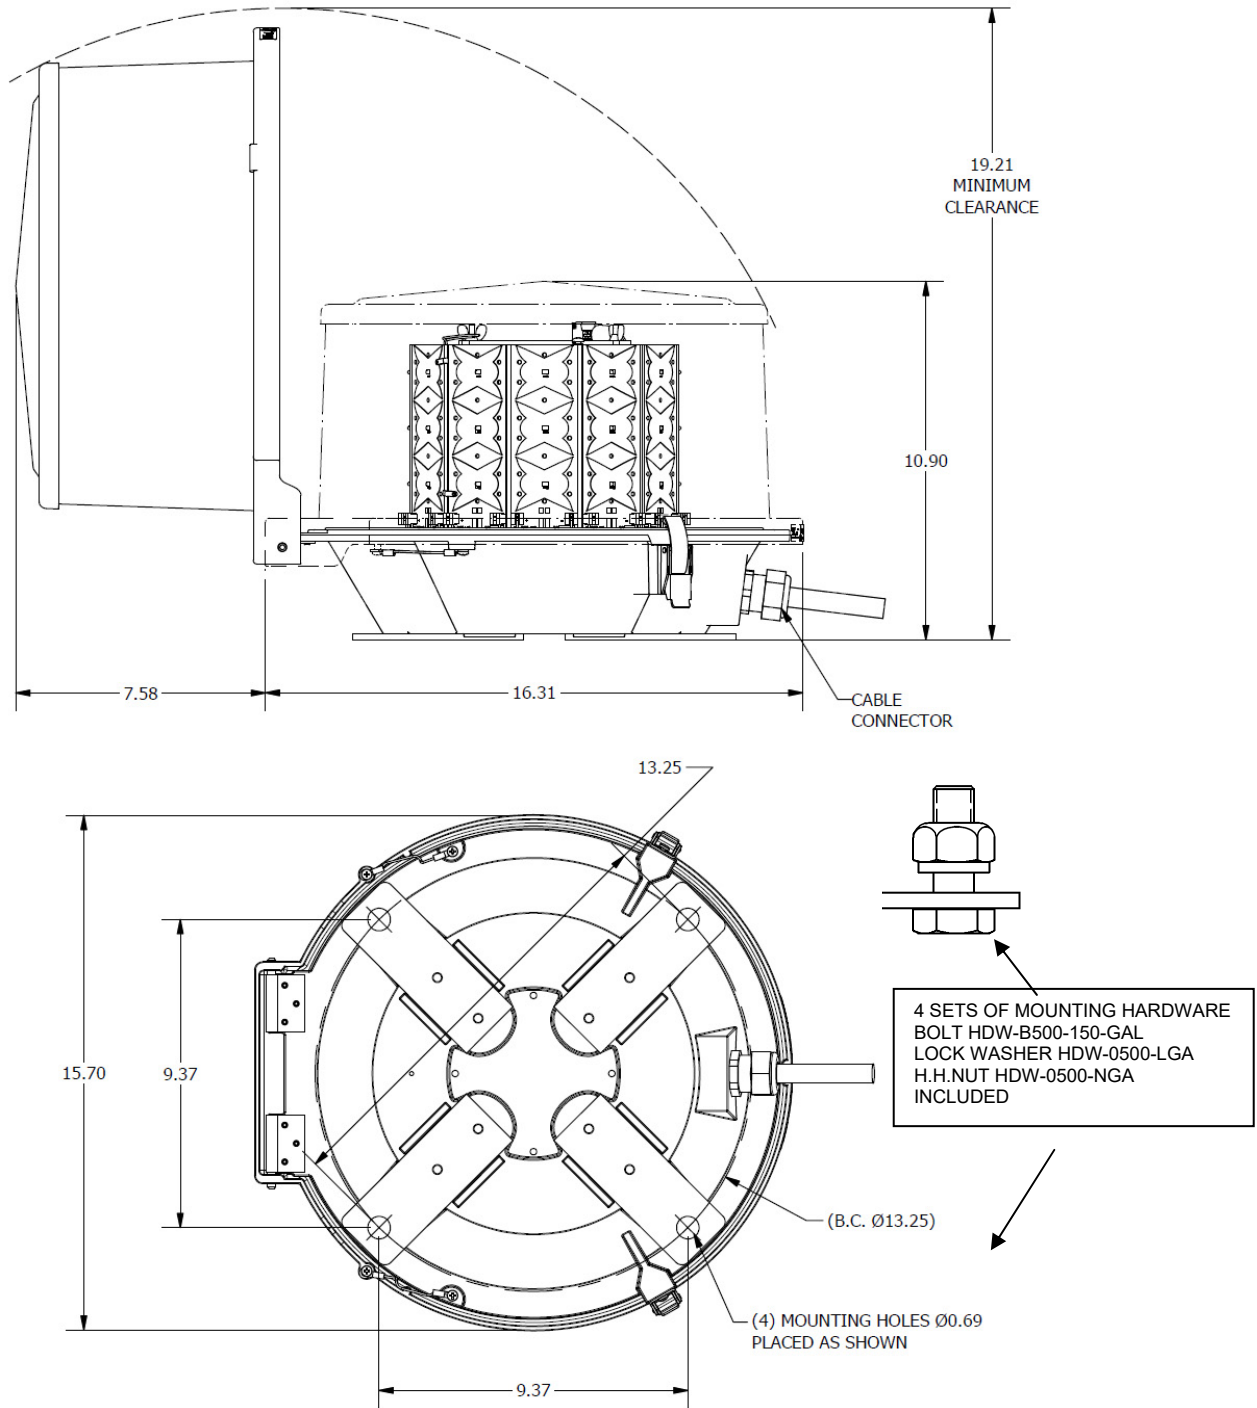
IFH-1710 Flash Head Dimensions and Mounting Detail
